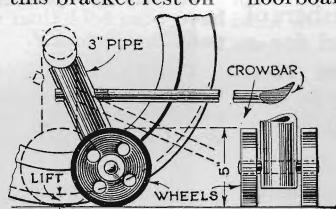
Simple jack made of an old crowbar, a bolt and pulley wheels
